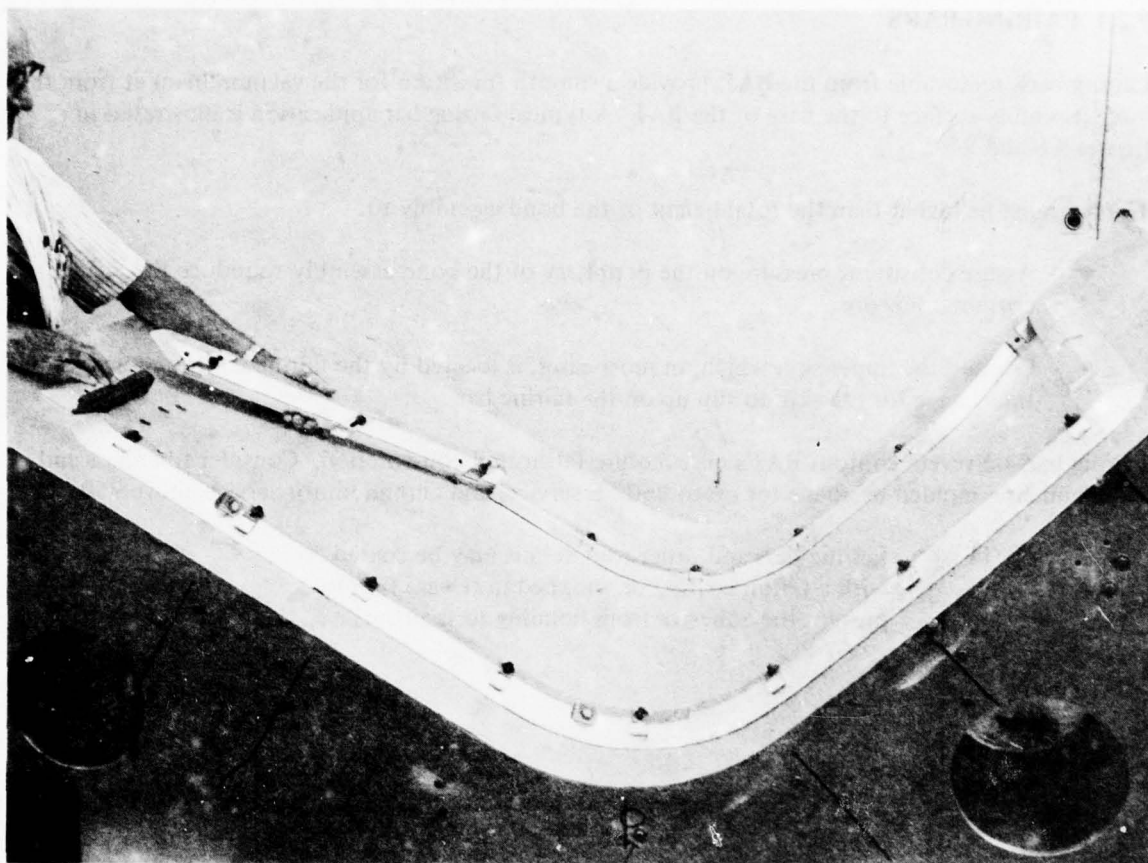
Typical Fairing Bars Shown on Bonding Tool
